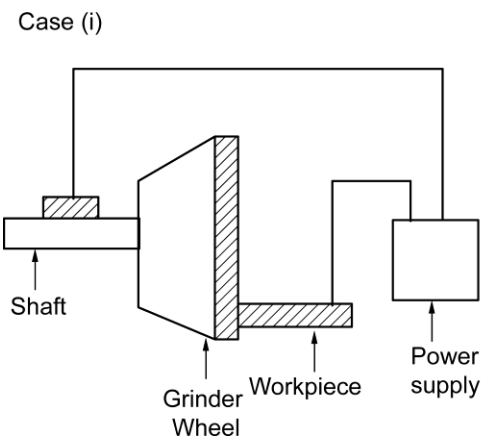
Configuration of electrically conductive workpiece and wheel
